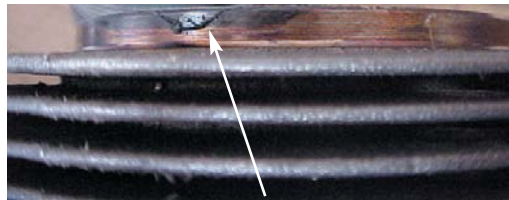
Cylinder liner fitted with glue on the cylinder head seat (upper cylinder liner side)
